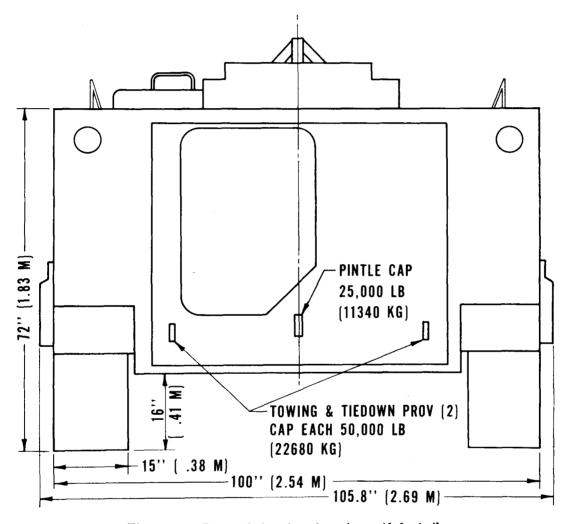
Rear end elevation of carrier, guided missile equipment, TOW.
